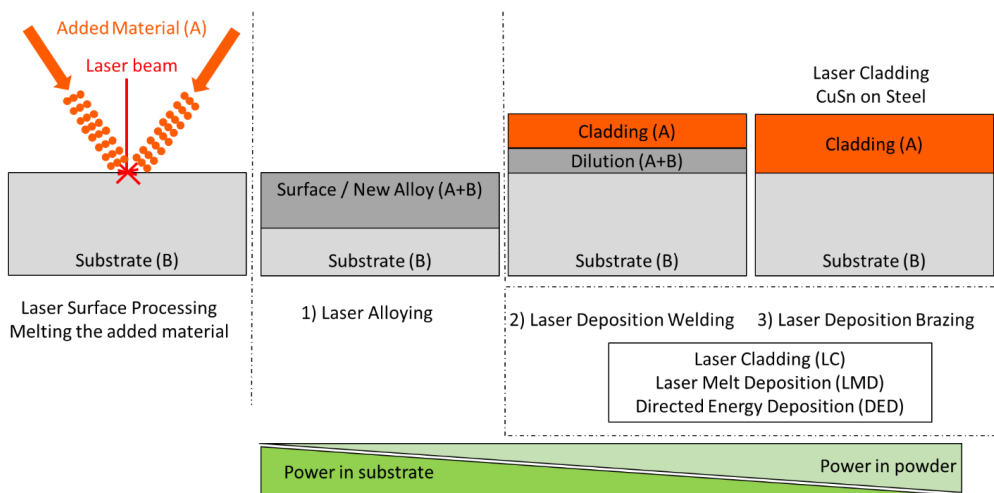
Difference between Laser Alloying, Laser Deposition Welding and Laser Deposition Brazing
